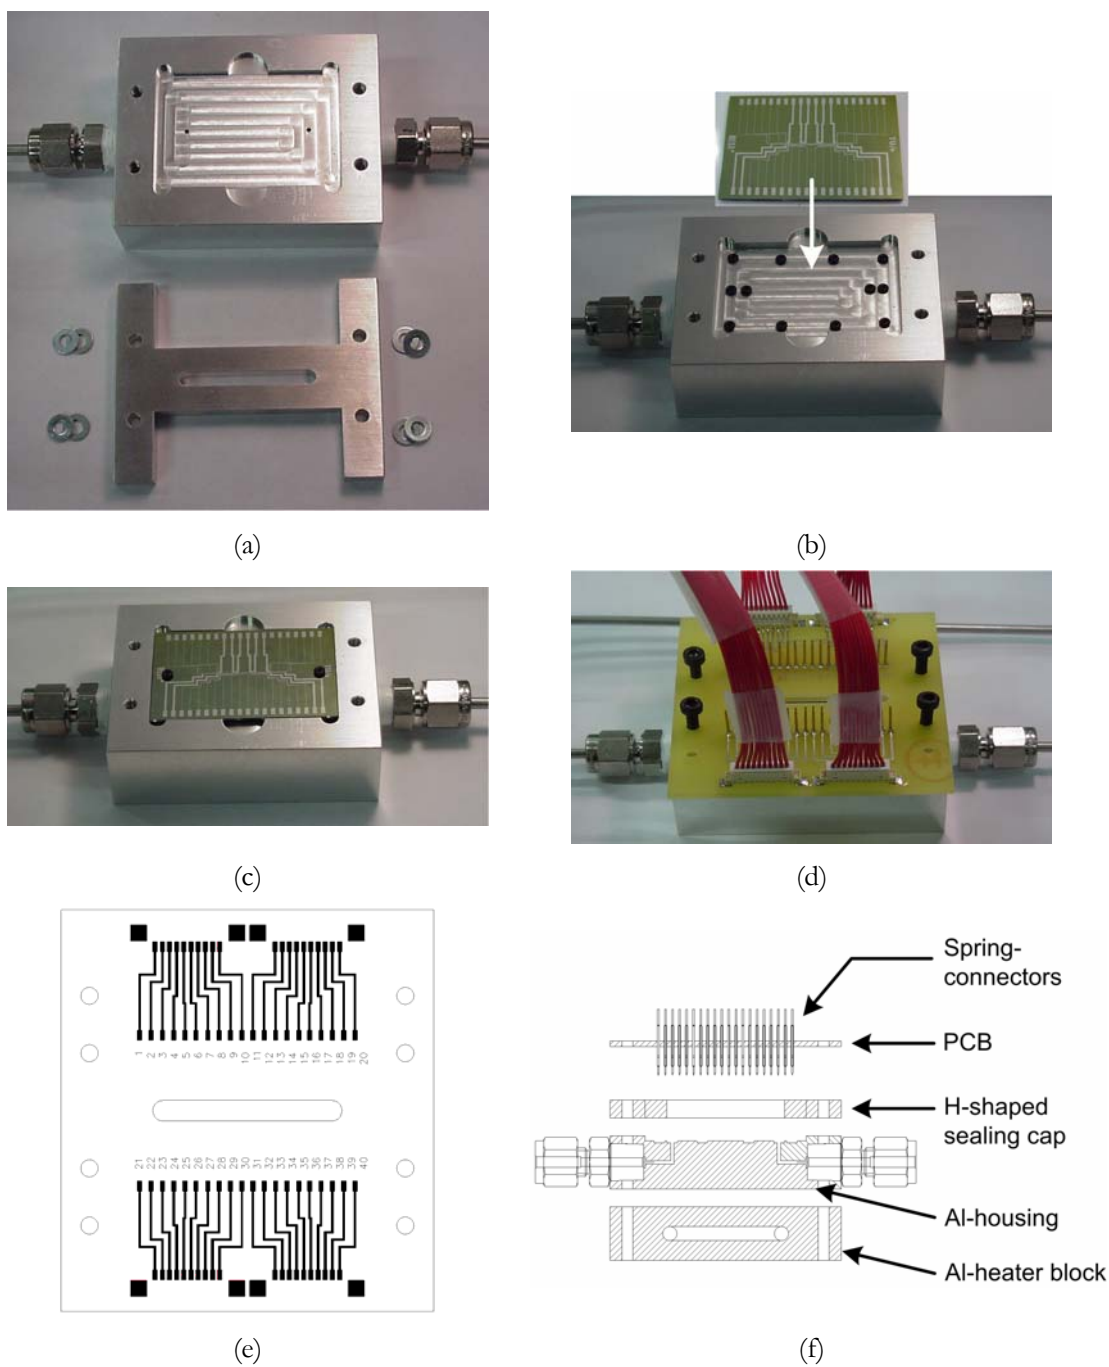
Connection-tool for FORSiM-microreactors: aluminum housing and H-shaped sealing cap (a); position of microreactor in aluminum housing (b) & (c); placement of PCB for linking microreactor to measurement set-up (d); layout of PCB (e) and schematic view of the complete connection-tool (f).
